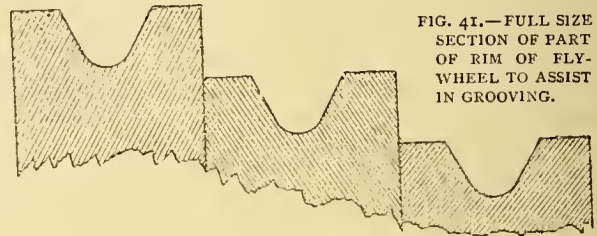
FULL SIZE SECTION OF PART OF RIM OF FLYWHEEL TO ASSIST IN GROOVING.
